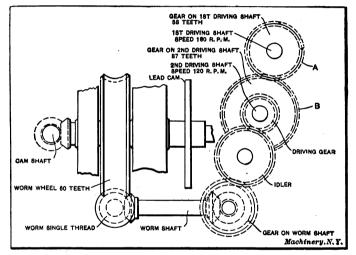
Diagram of Gearing on the No. O Brown & Sharpe Automatic Screw Machine
